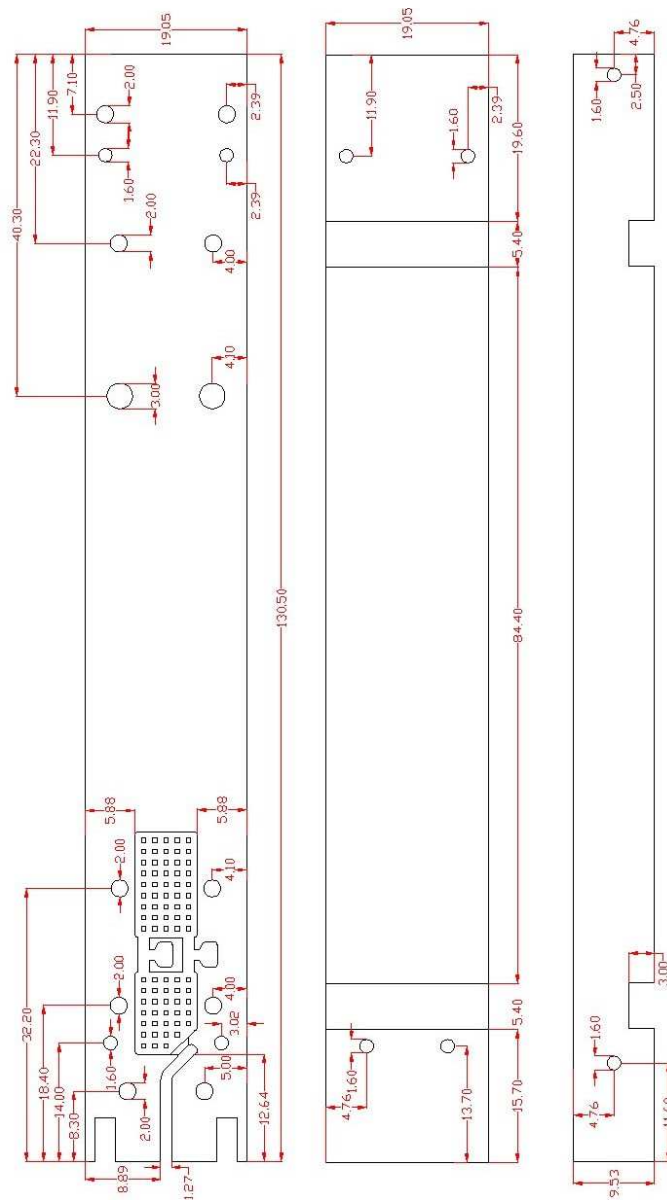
Views and dimensions (mm) of the bottom metal block of the packaging aluminium block.
